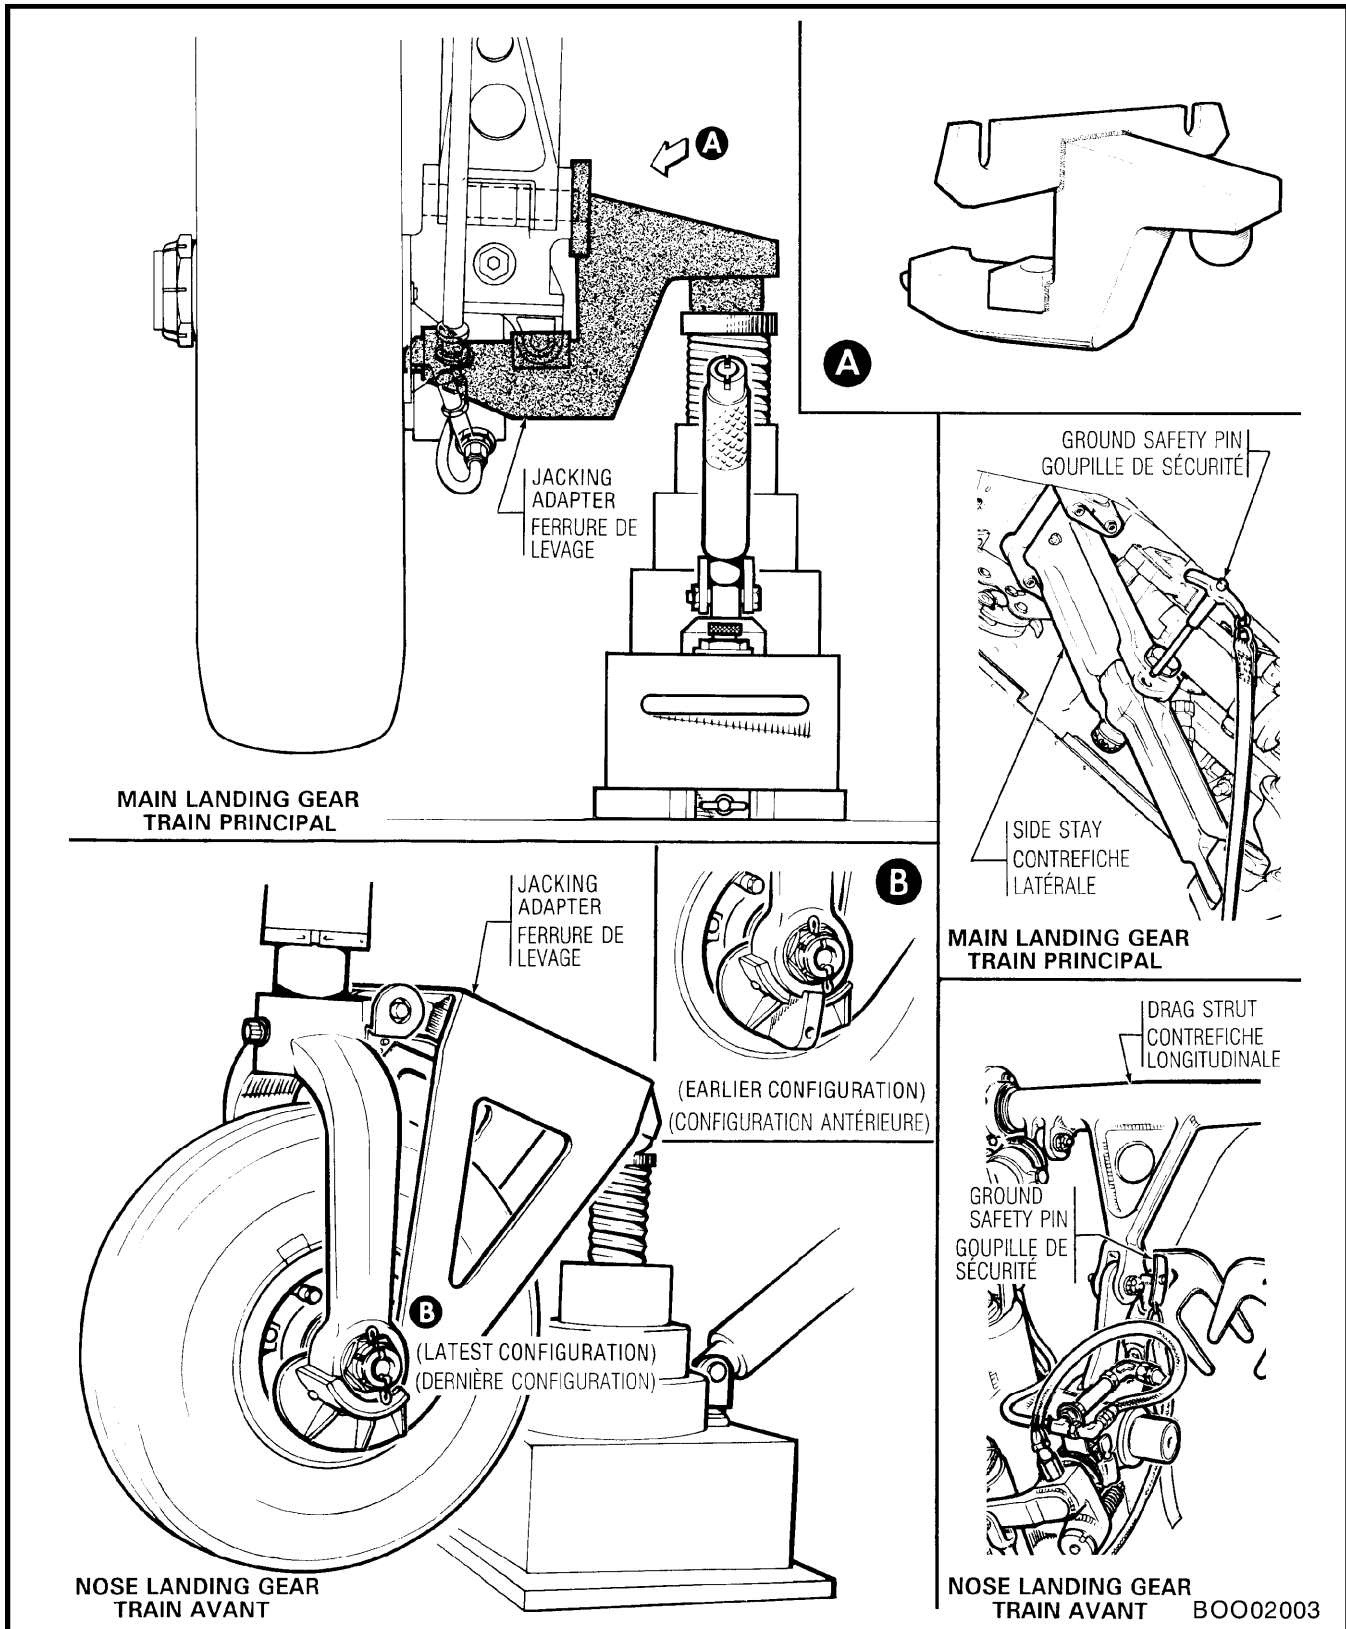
Landing Gear Jacking and Ground Locking Pins
